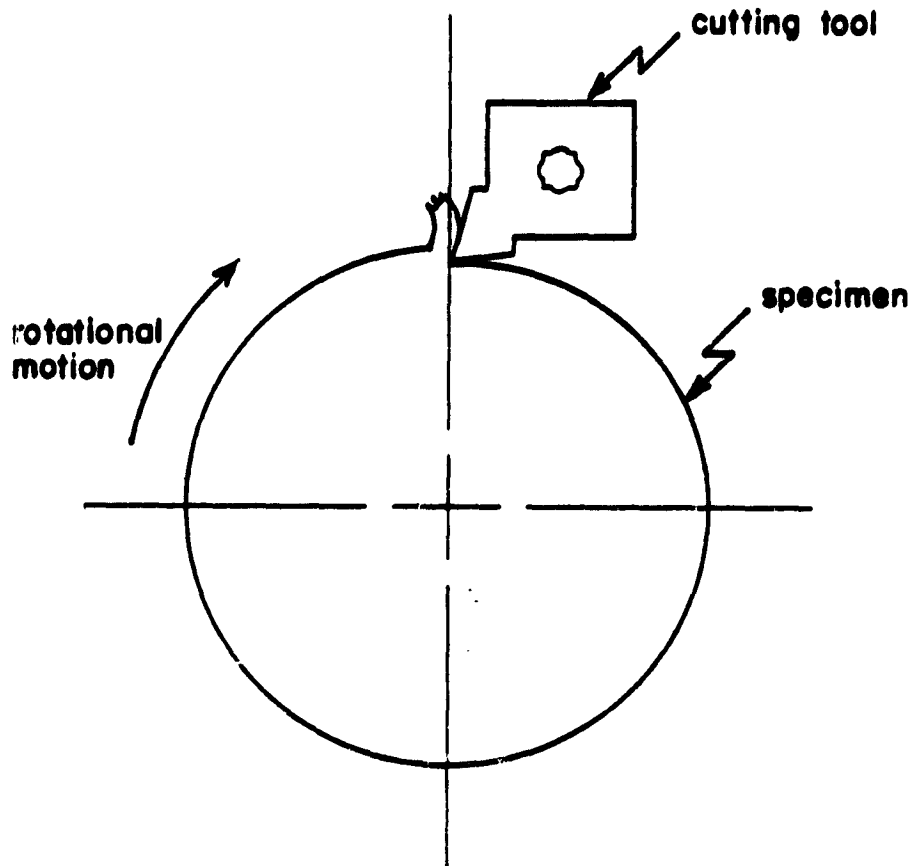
Alignment of Tool and Workpiece for Orthogonal Conditions
